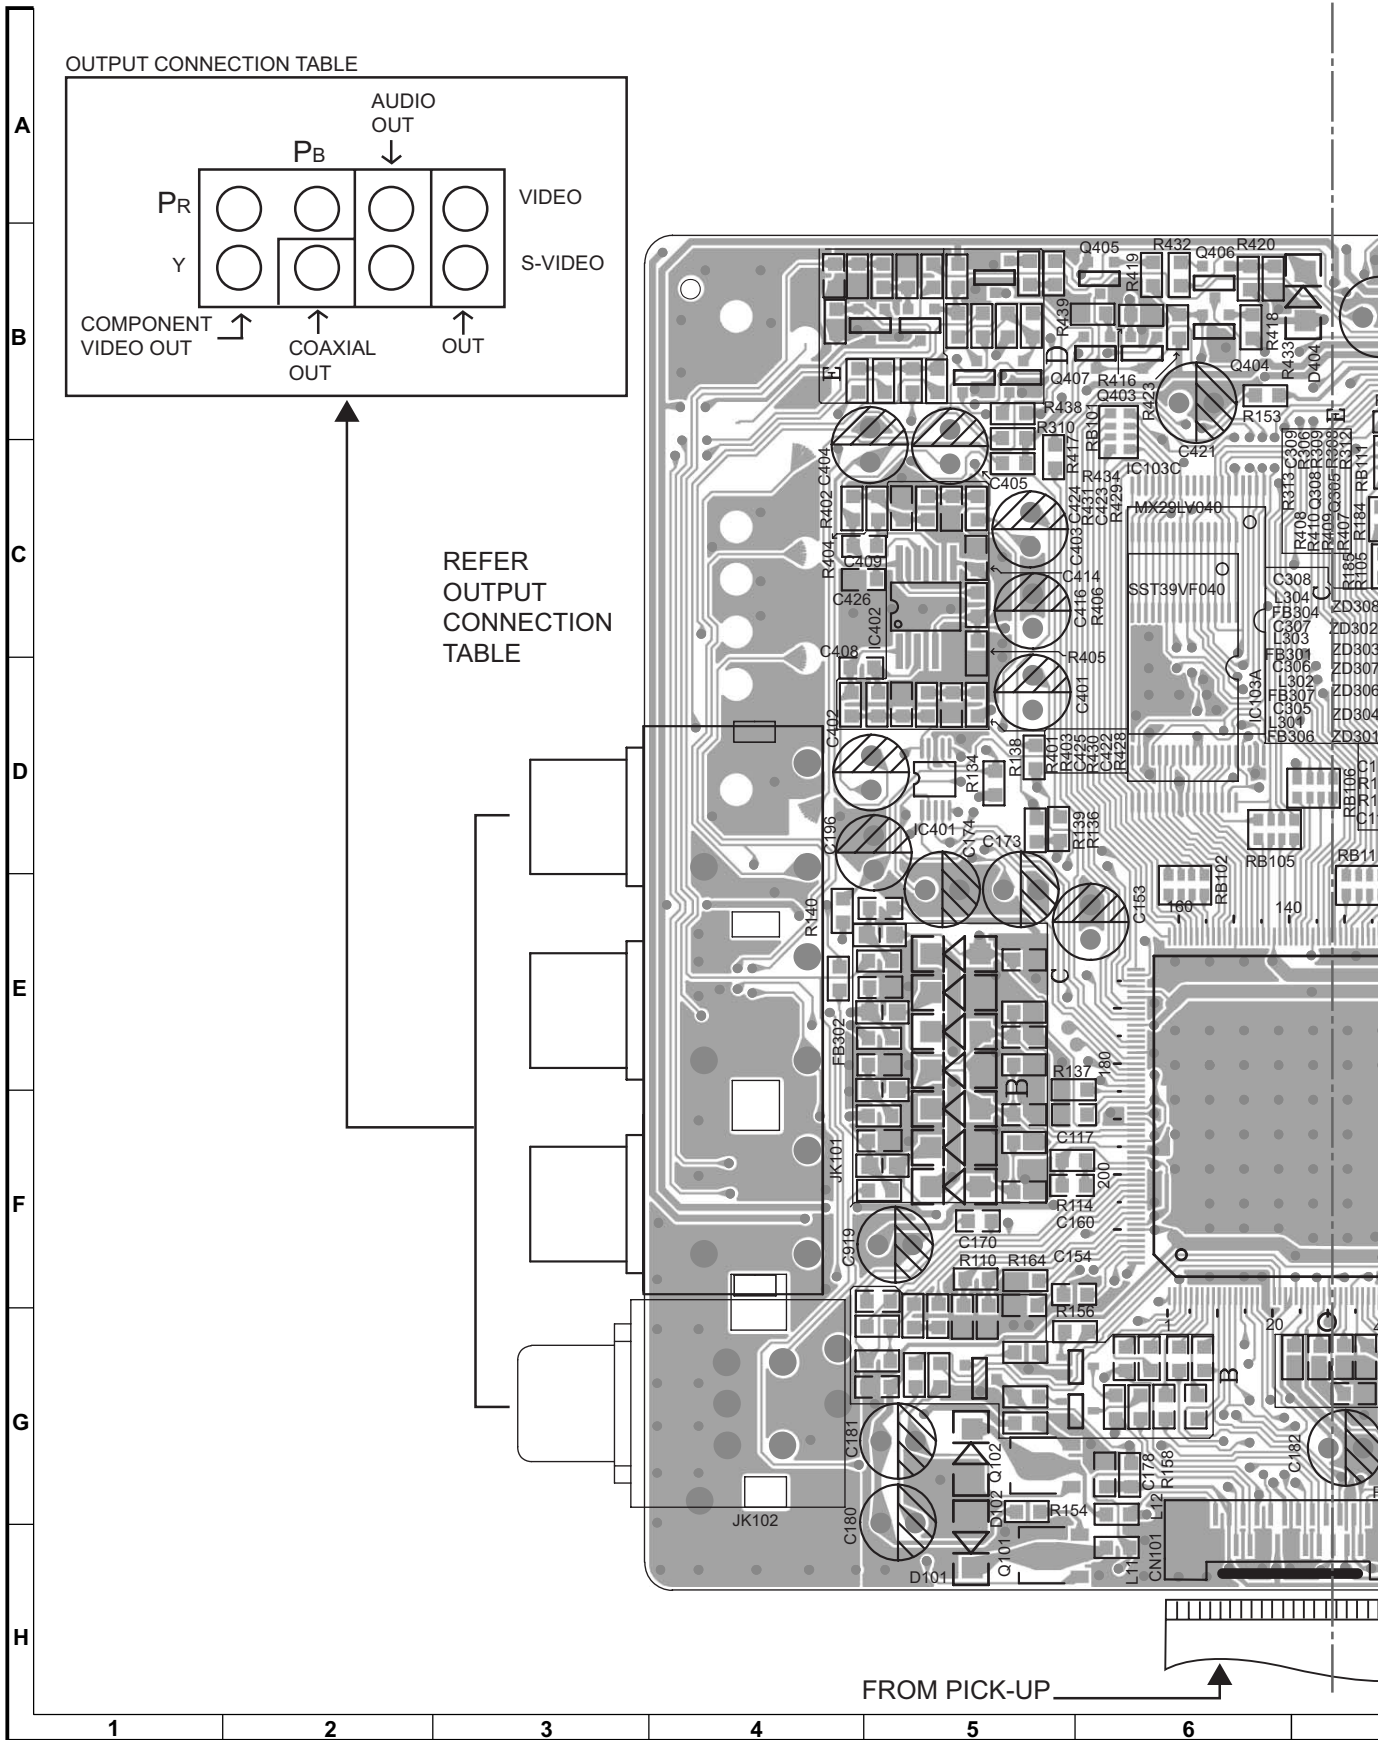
WIRING SIDE OF MAIN PCB (TOP VIEW) 1/2
